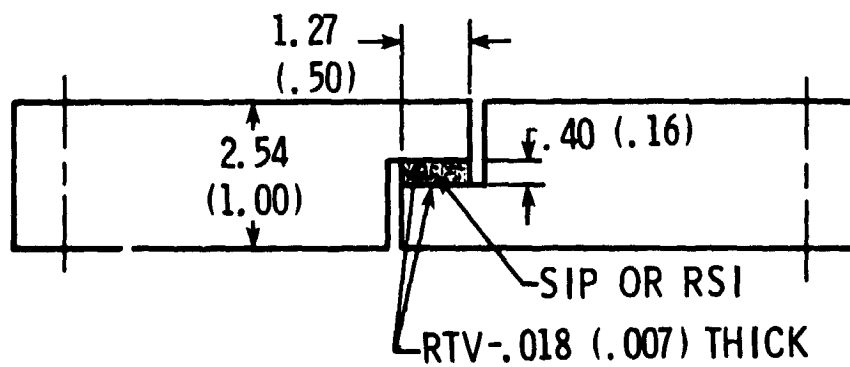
Details of napkin ring test specimen. Dimensions given in cm (inches).
